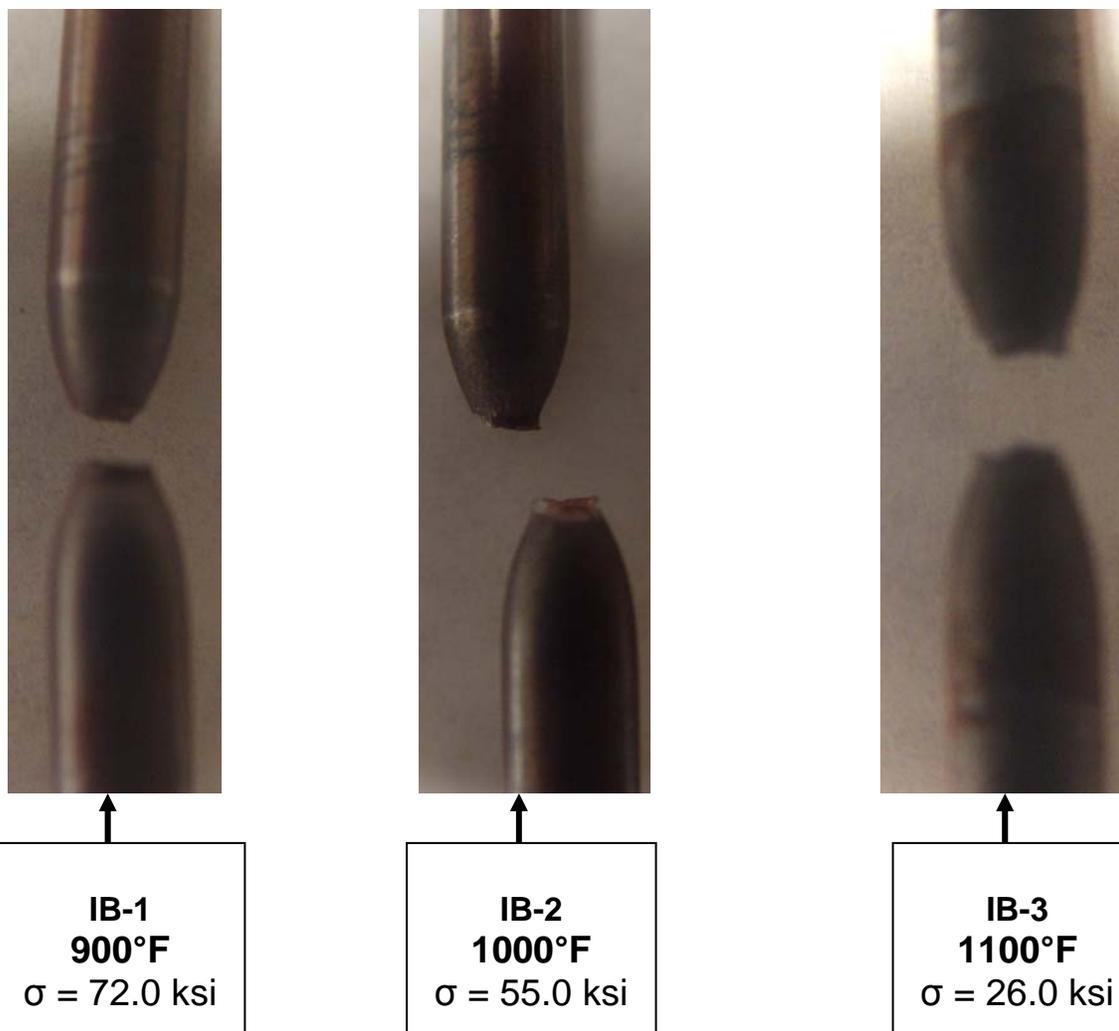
Creep-tested weldment specimens from submerged arc weld IB.
